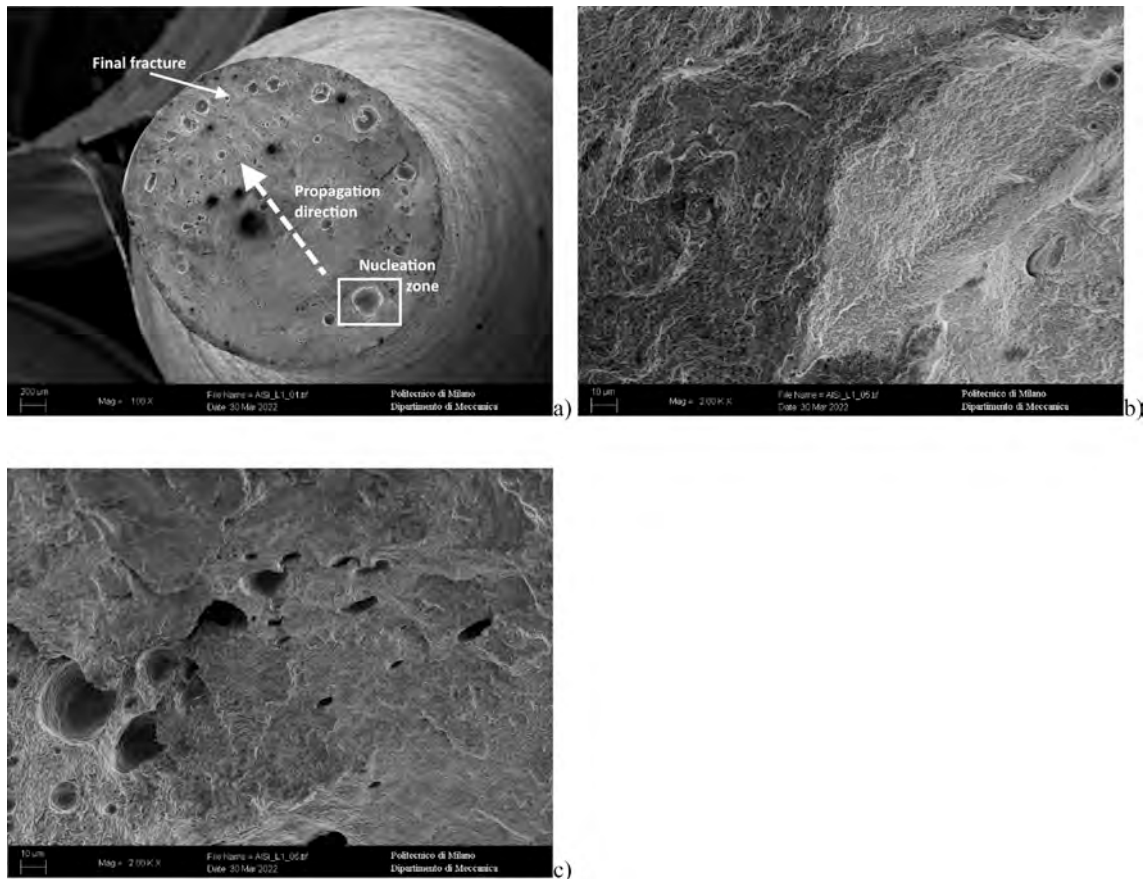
Fracture surface analysis of specimen LCF1- (a) fracture surface, (b) propagation zone, (c) fracture zone. Macro- and micro-porosity is clearly visible.
